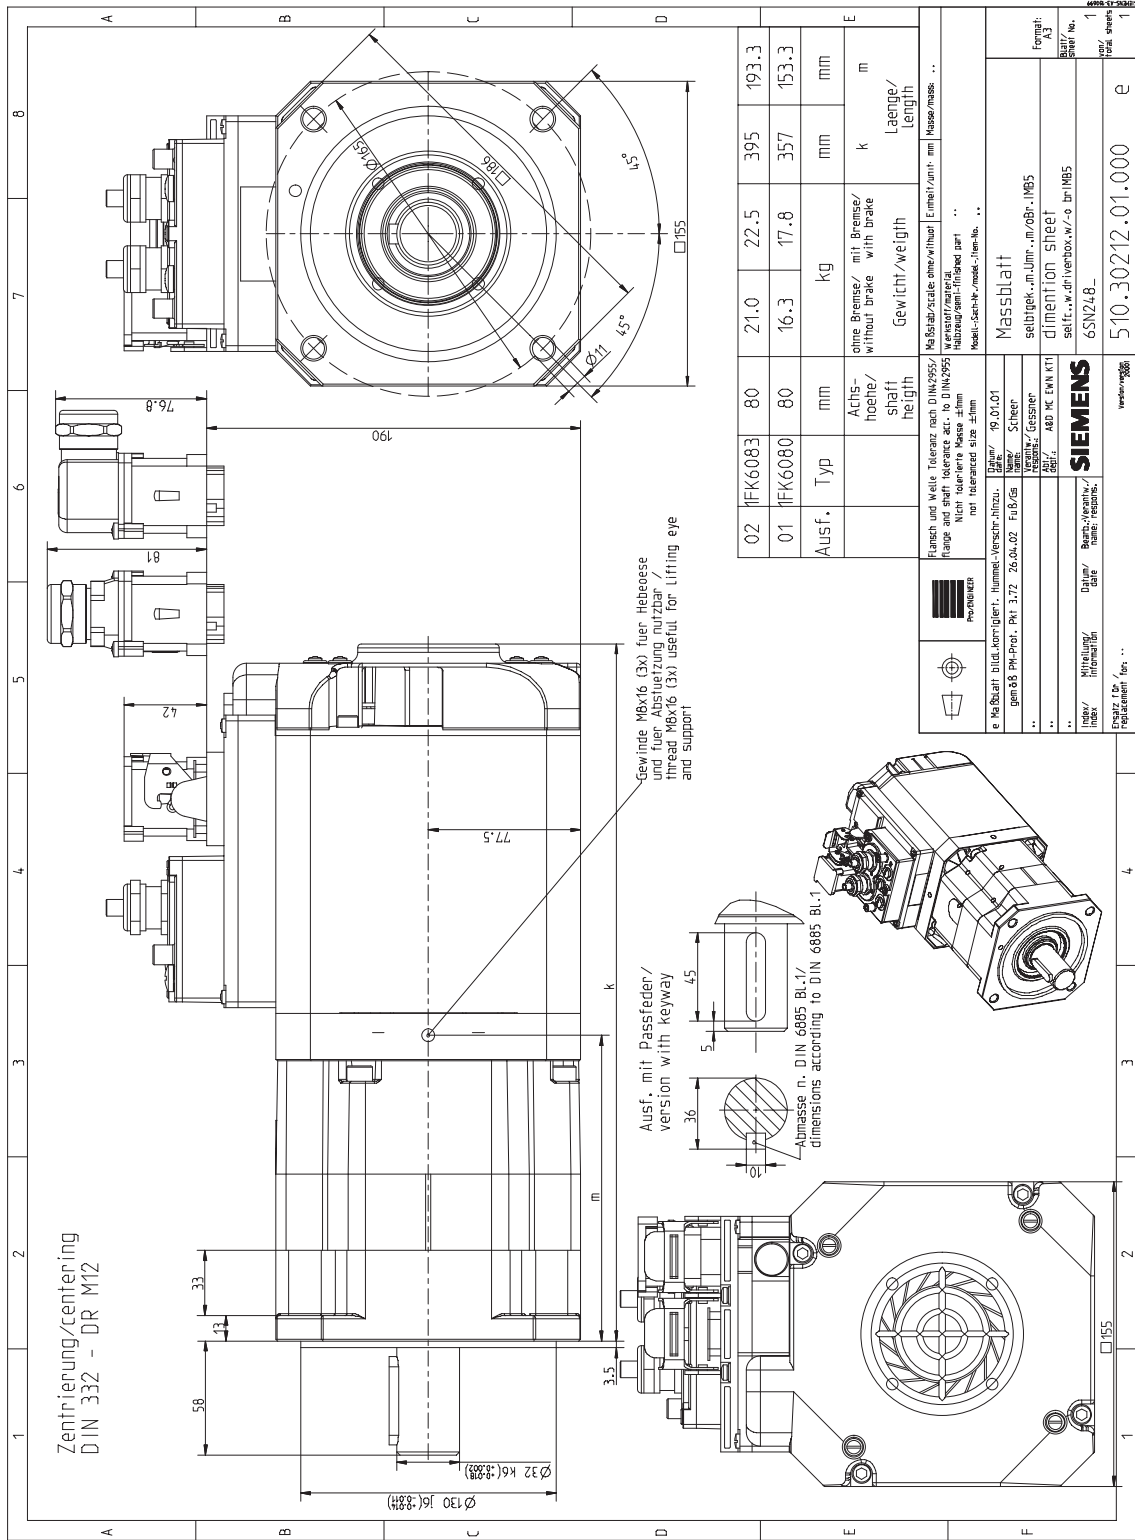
Dimension drawing POSMO SI 6SN248□-2CF00-0G□□
